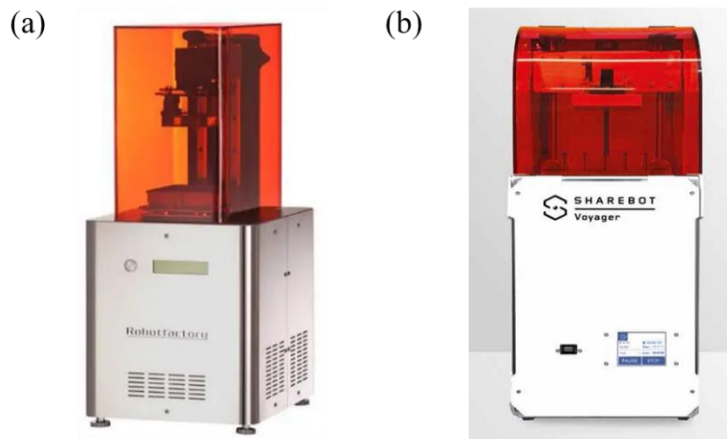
(a) 3DL Printer - HD 2.0+ and (b) Voyager Z-20 DLP printers. Both printers use a bottom-up configuration.
